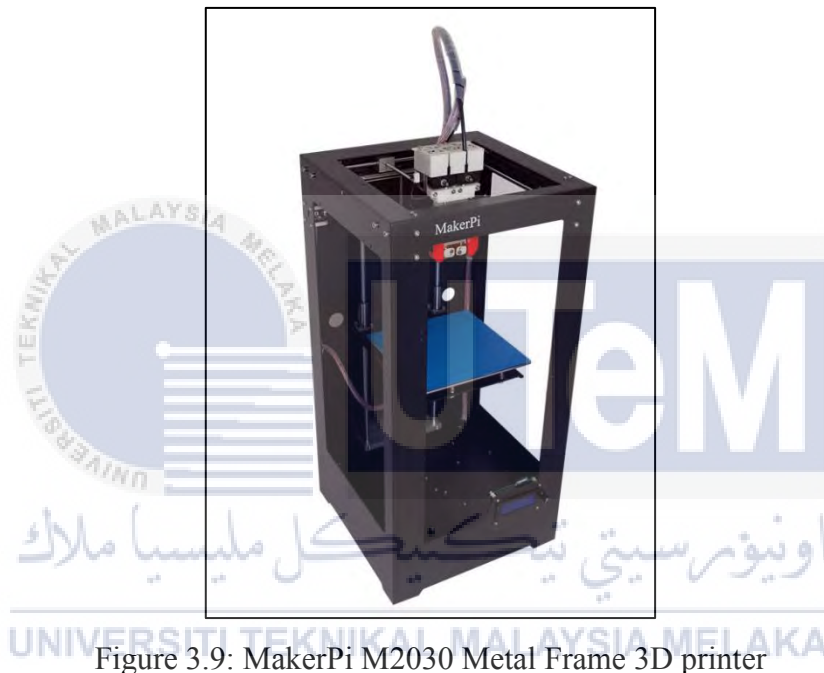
MakerPi M2030 Metal Frame 3D printer
